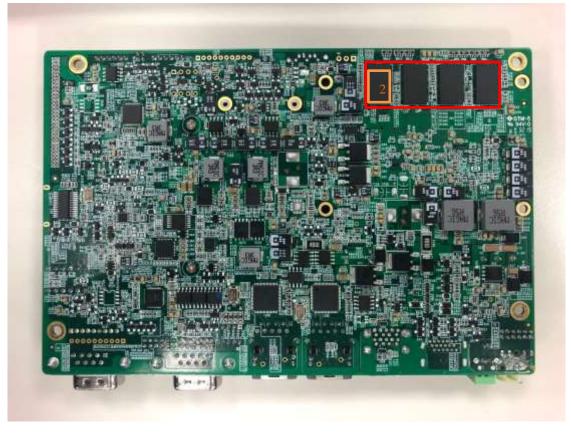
Jumpers and Connectors Location- Board Bottom
